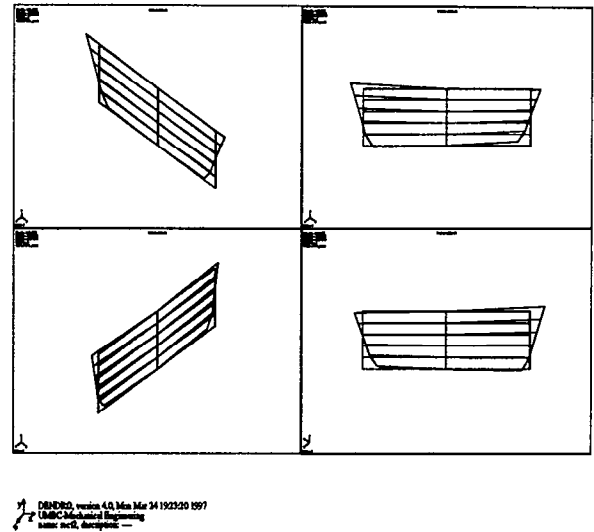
Cross sectional views of nominal vs machined hole, planes perpendicular to xy plane.
